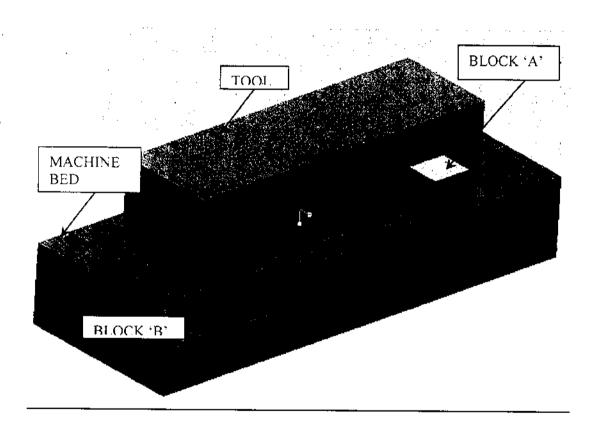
ARRANGEMENT OF CENTERING BLOCKS IN THE MACHINE BED
